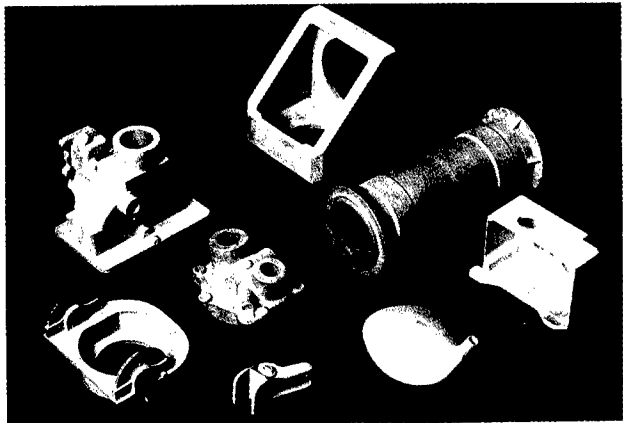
Investment castings of SiCp reinforced aluminum composites by the vacuum differential pressure casting, middle part is the pump-housing.
